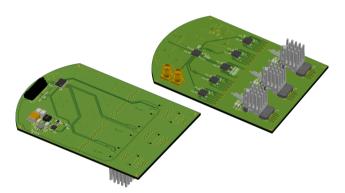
A 3D representation of the clock and reset daughter board. Left: Bottom view of the board showing the mezzanine connector and DC-DC circuitry. Right: Top view of the board showing the fan-out ICs and the three Firefly optical transceivers.
